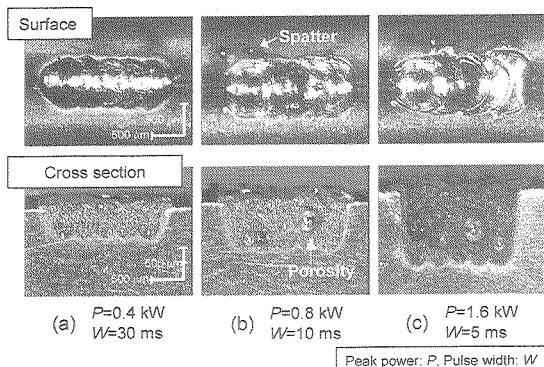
Surfaces and cross sections of micro butt seam welding of pure titanium with pulsed Nd:YAG laser.
